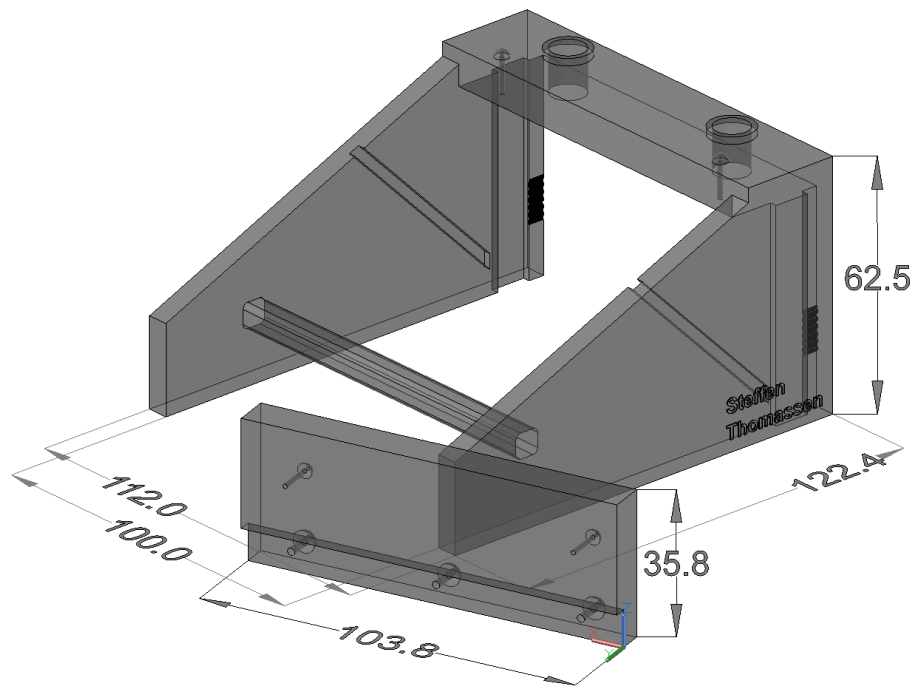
Final AutoCAD model ready for 3D-print, without guide plate. Dimensions are in mm.
